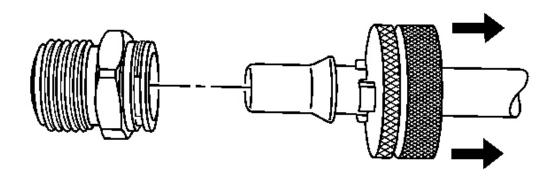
Disengaging Pipe From TOC Pipe Fitting Courtesy of GENERAL MOTORS CORP.
